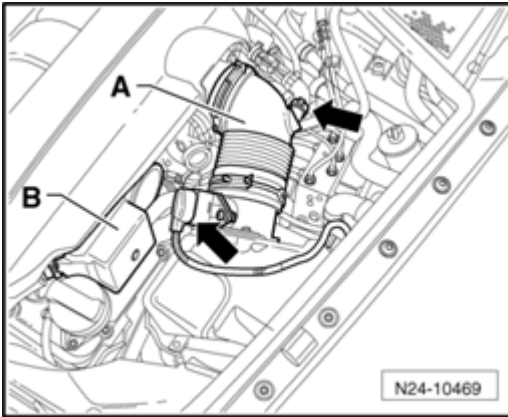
Removing Connector From Mass Air Flow Sensor, Hose, Crankcase Ventilation, Intake Hose & Pressure Control Valve
